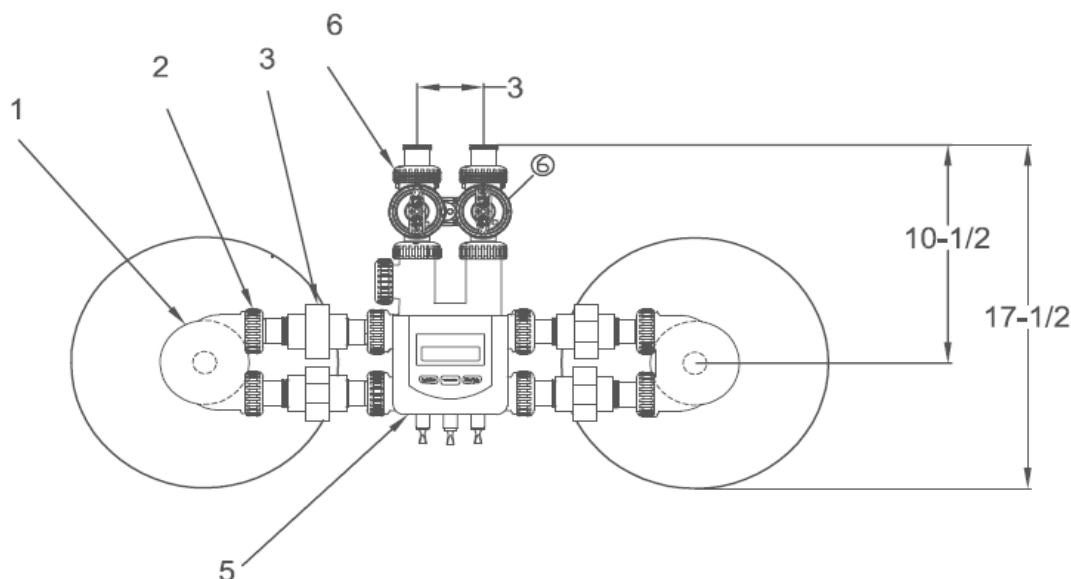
SolmeteX npXtra-POE12 Control Head Assembly
